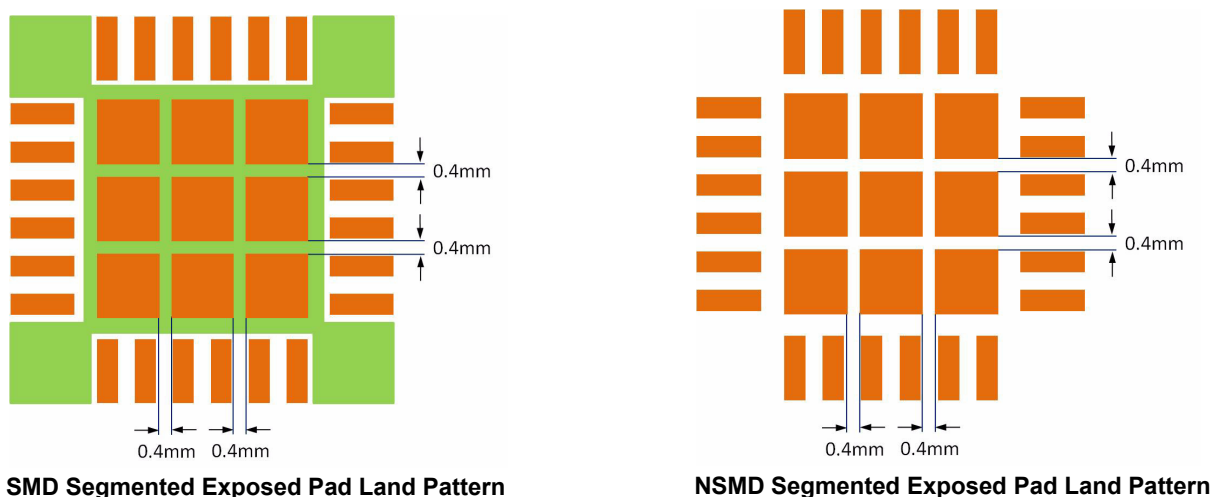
Alternative Exposed Pad Design, EP Segmented by Matrix Pad Design
